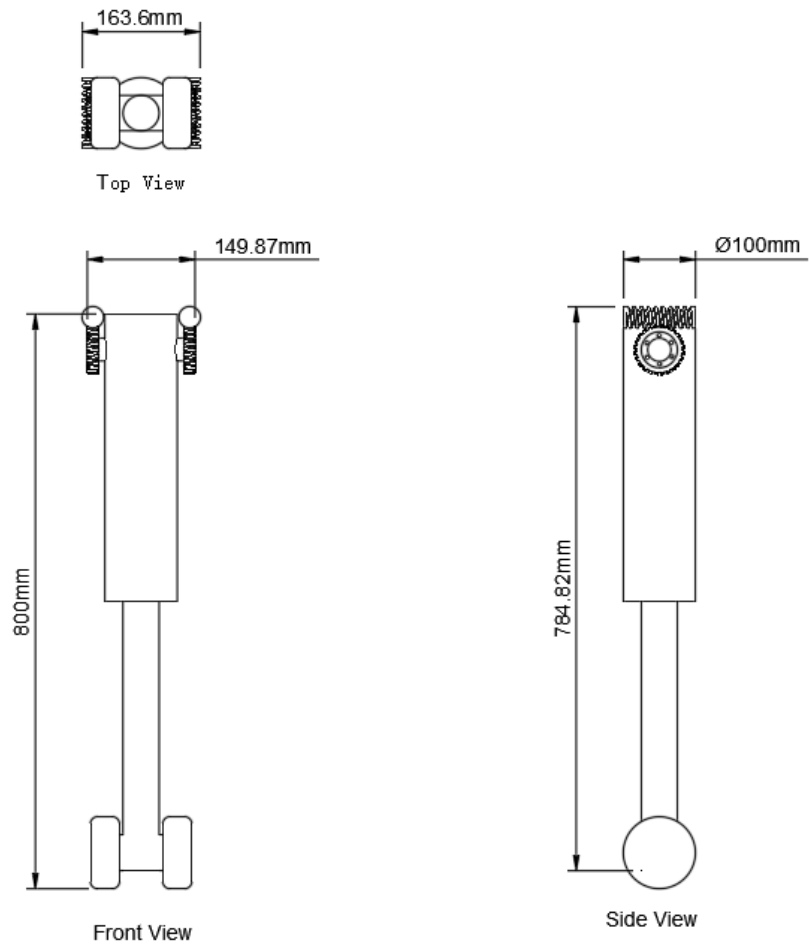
Landing Gear (with worm gear) Fully Deployed Three-Dimensional View
